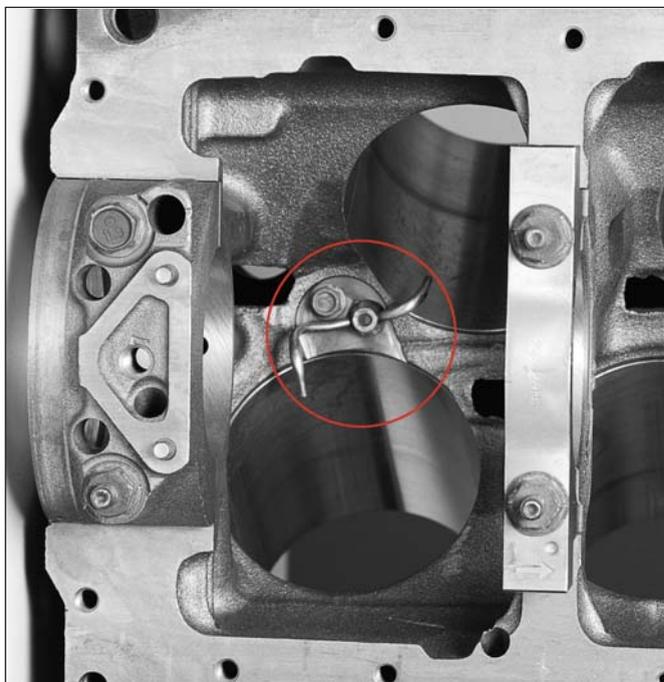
The early 3.5L block has piston cooling jets on the back two cylinders.
